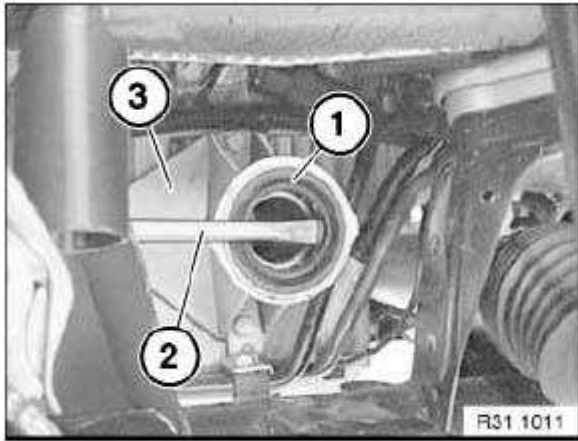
Shaft Seal, Screwdriver And Bearing Block
